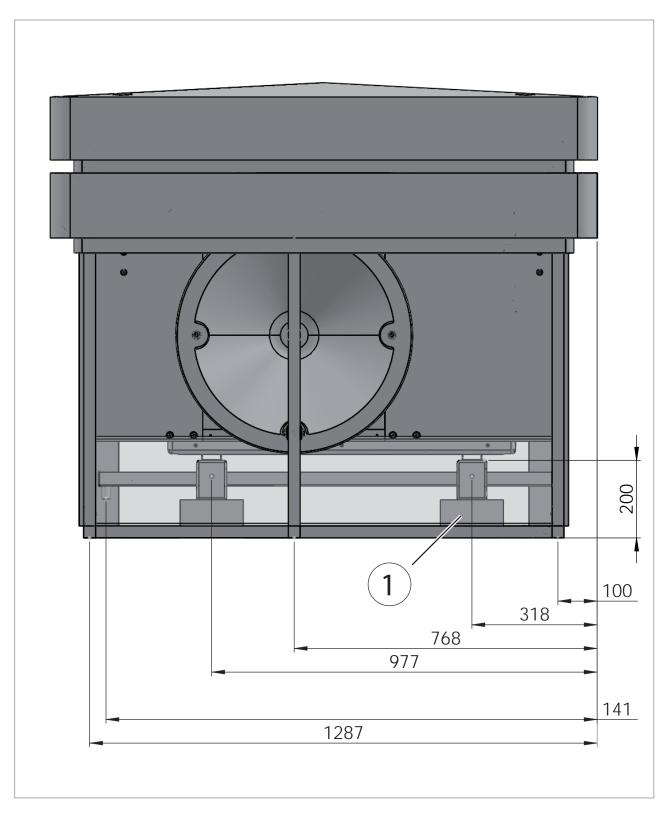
Front view noise protection hood SWK 4 (all dimensions in mm)
